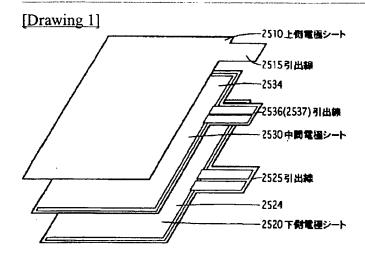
It is the decomposition perspective diagram of the display of the input unit shown in drawing 13.
